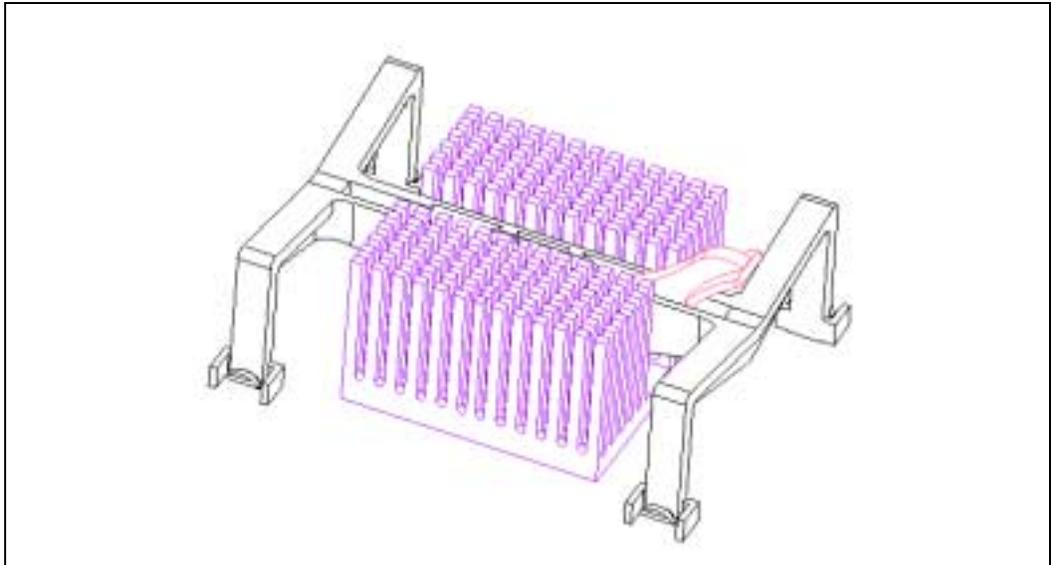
Heatsink Keep-Out and Solder Down Anchor Location
